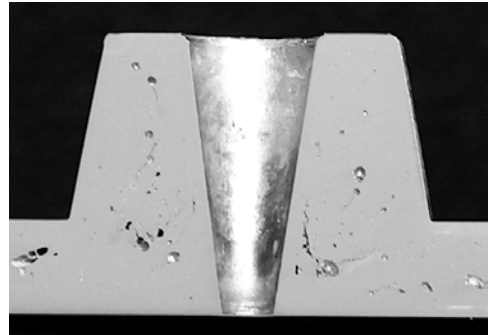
As-cast surface of AM-HP-2 - an example of the mirror finish achievable on the casting facing the polished section of the die.
